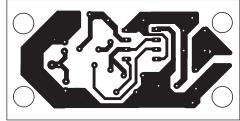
Actual-size, single side PCB layout for the circuit in Fig. 2
